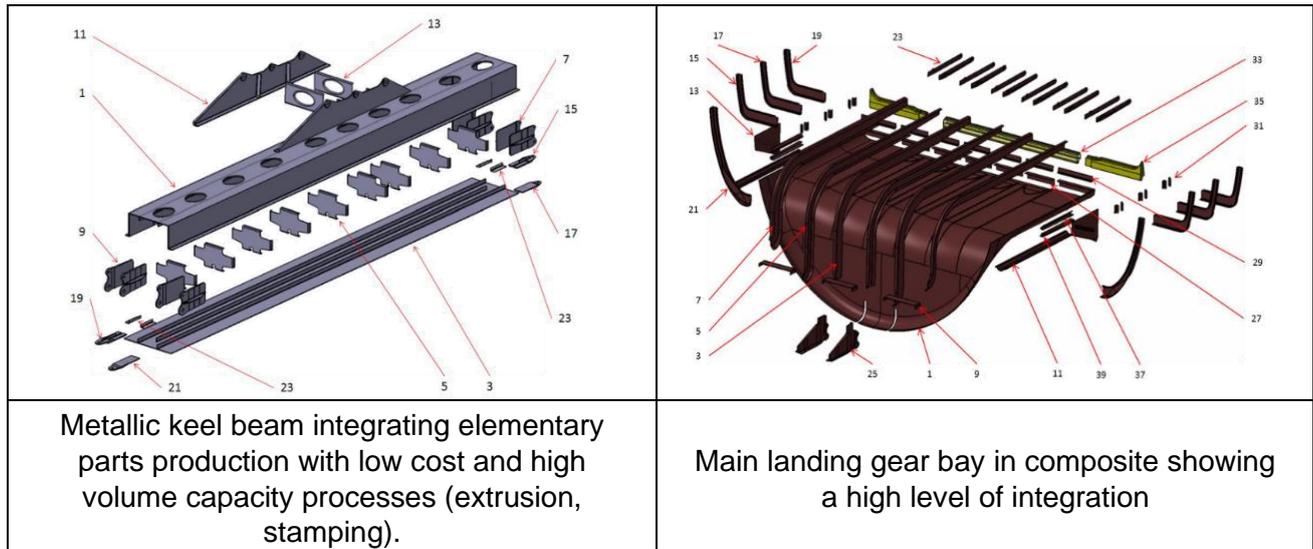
Lower center fuselage technology examples for low-cost processes for elementary parts and assembly
